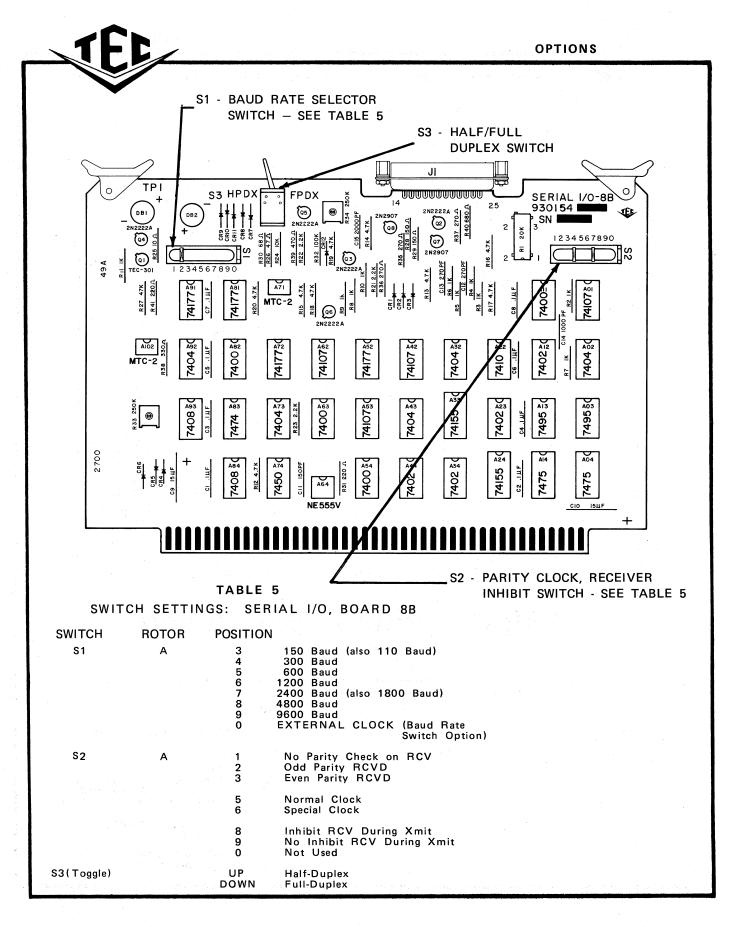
SWITCH OPTIONS, SERIAL I/O 8B PCB
